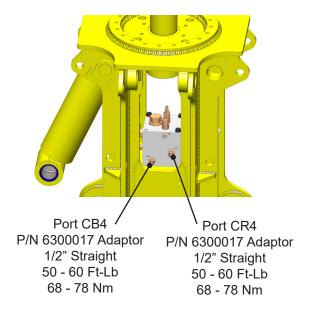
Valve / Manifold Fittings Cylinder 4 Location
